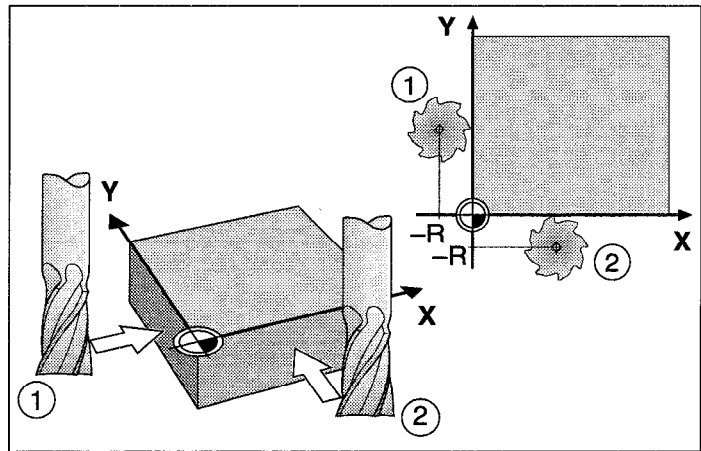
Setting the datum in the working plane; plan view (upper right)
